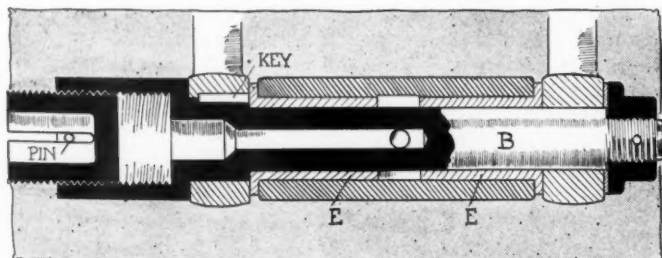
New European form of spring shackle for motor trucks, showing two bushings *E* with clearance space for grease between their opposite ends, also means for using a long, powerful screw-driver to place the necessary pressure on the grease
